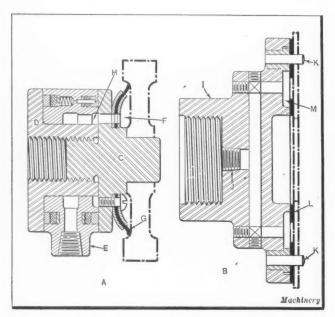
Design of Chucks for holding Gears and Circular Plates on Machines by Vacuum
